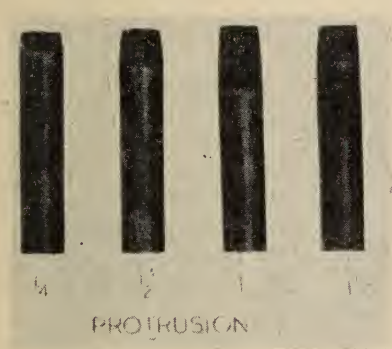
Illustration of undamaged Die Skin of Carbon. Photograph of some Carbons used for Protrusion Tests for Fig. 6 showing Formation. Note clear cut Line marking position of end of jaws and undamaged Die Skin on Carbons.
